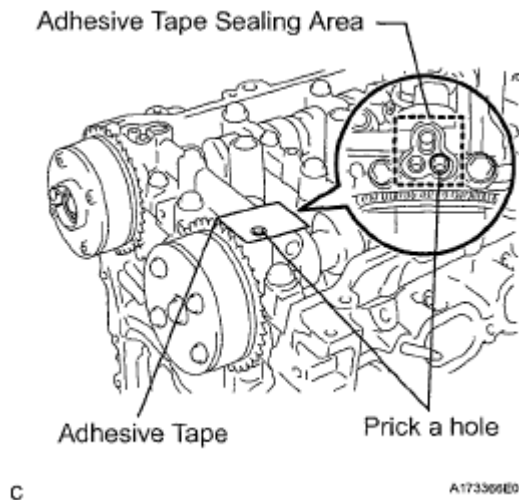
Identifying Camshaft Timing Gear Sealing Area
